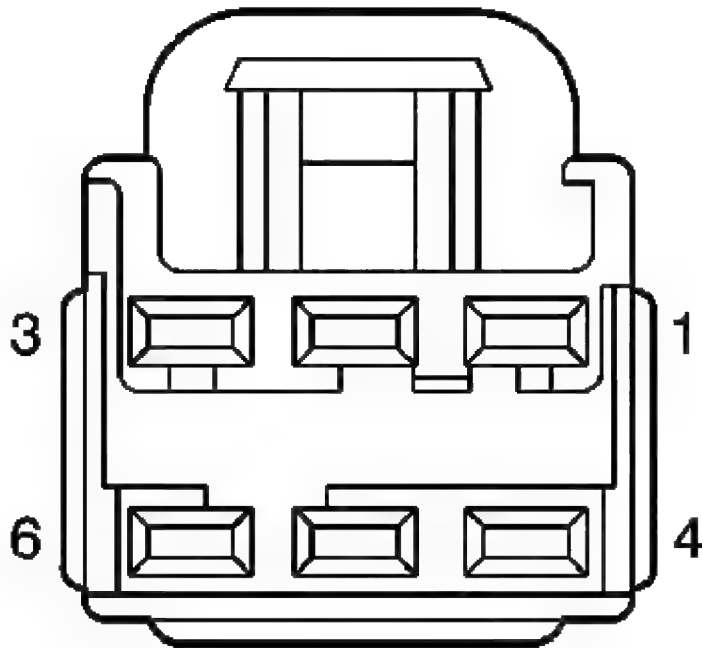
Driver Seat Adjuster Motor Assembly C1 (A45) Connector End View
